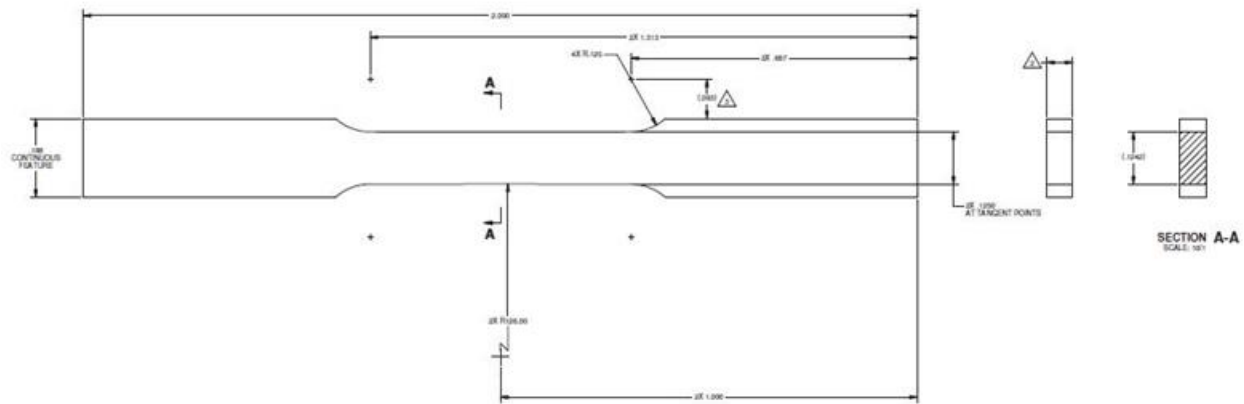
Half-sub-size flat tensile specimen fabrication specification.
